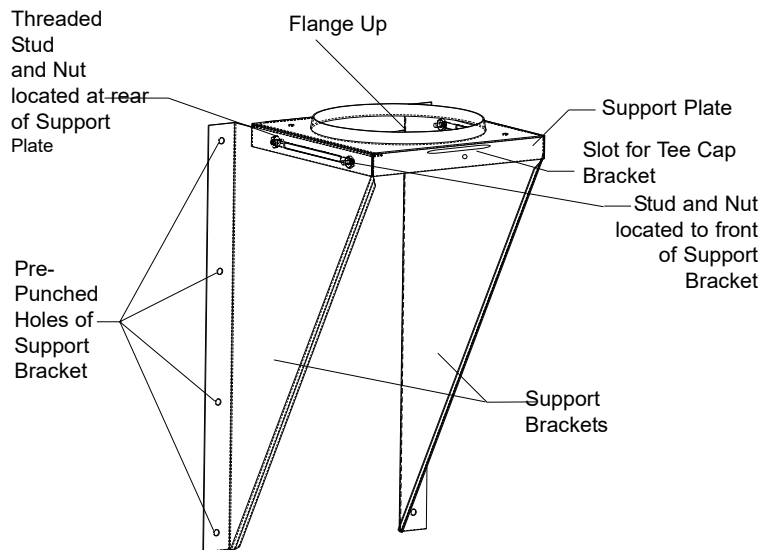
FRONT VIEW OF WALL SUPPORT ASSEMBLY
